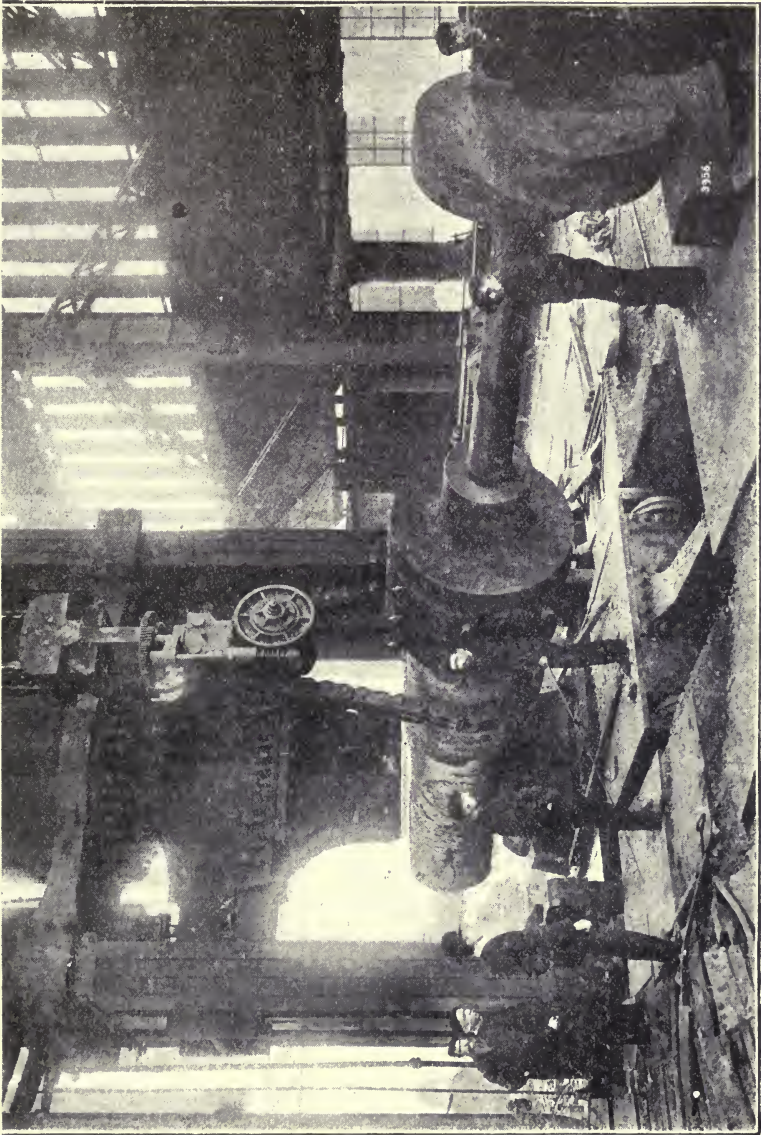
Hydraulic Forging Press at Messrs. Beardmore's Parkhead Works.
